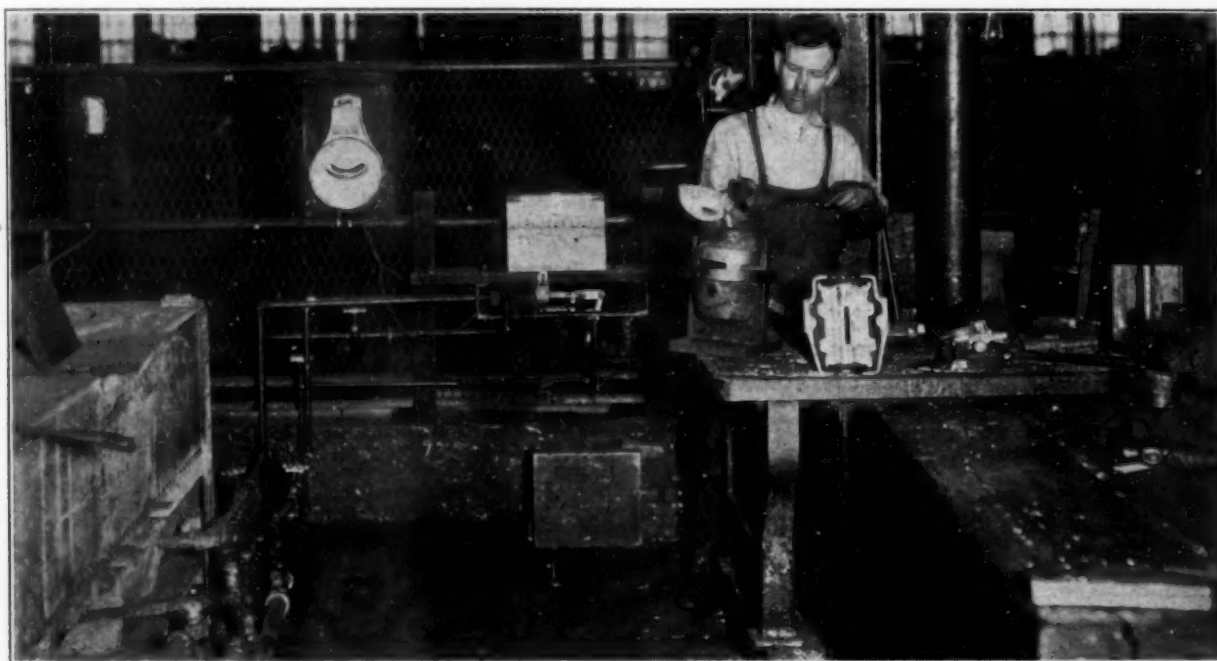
SHOWING THERMOSTATIC APPARATUS FOR REGULATING FLOW OF GAS AND A VIEW OF POURING A BEARING.
